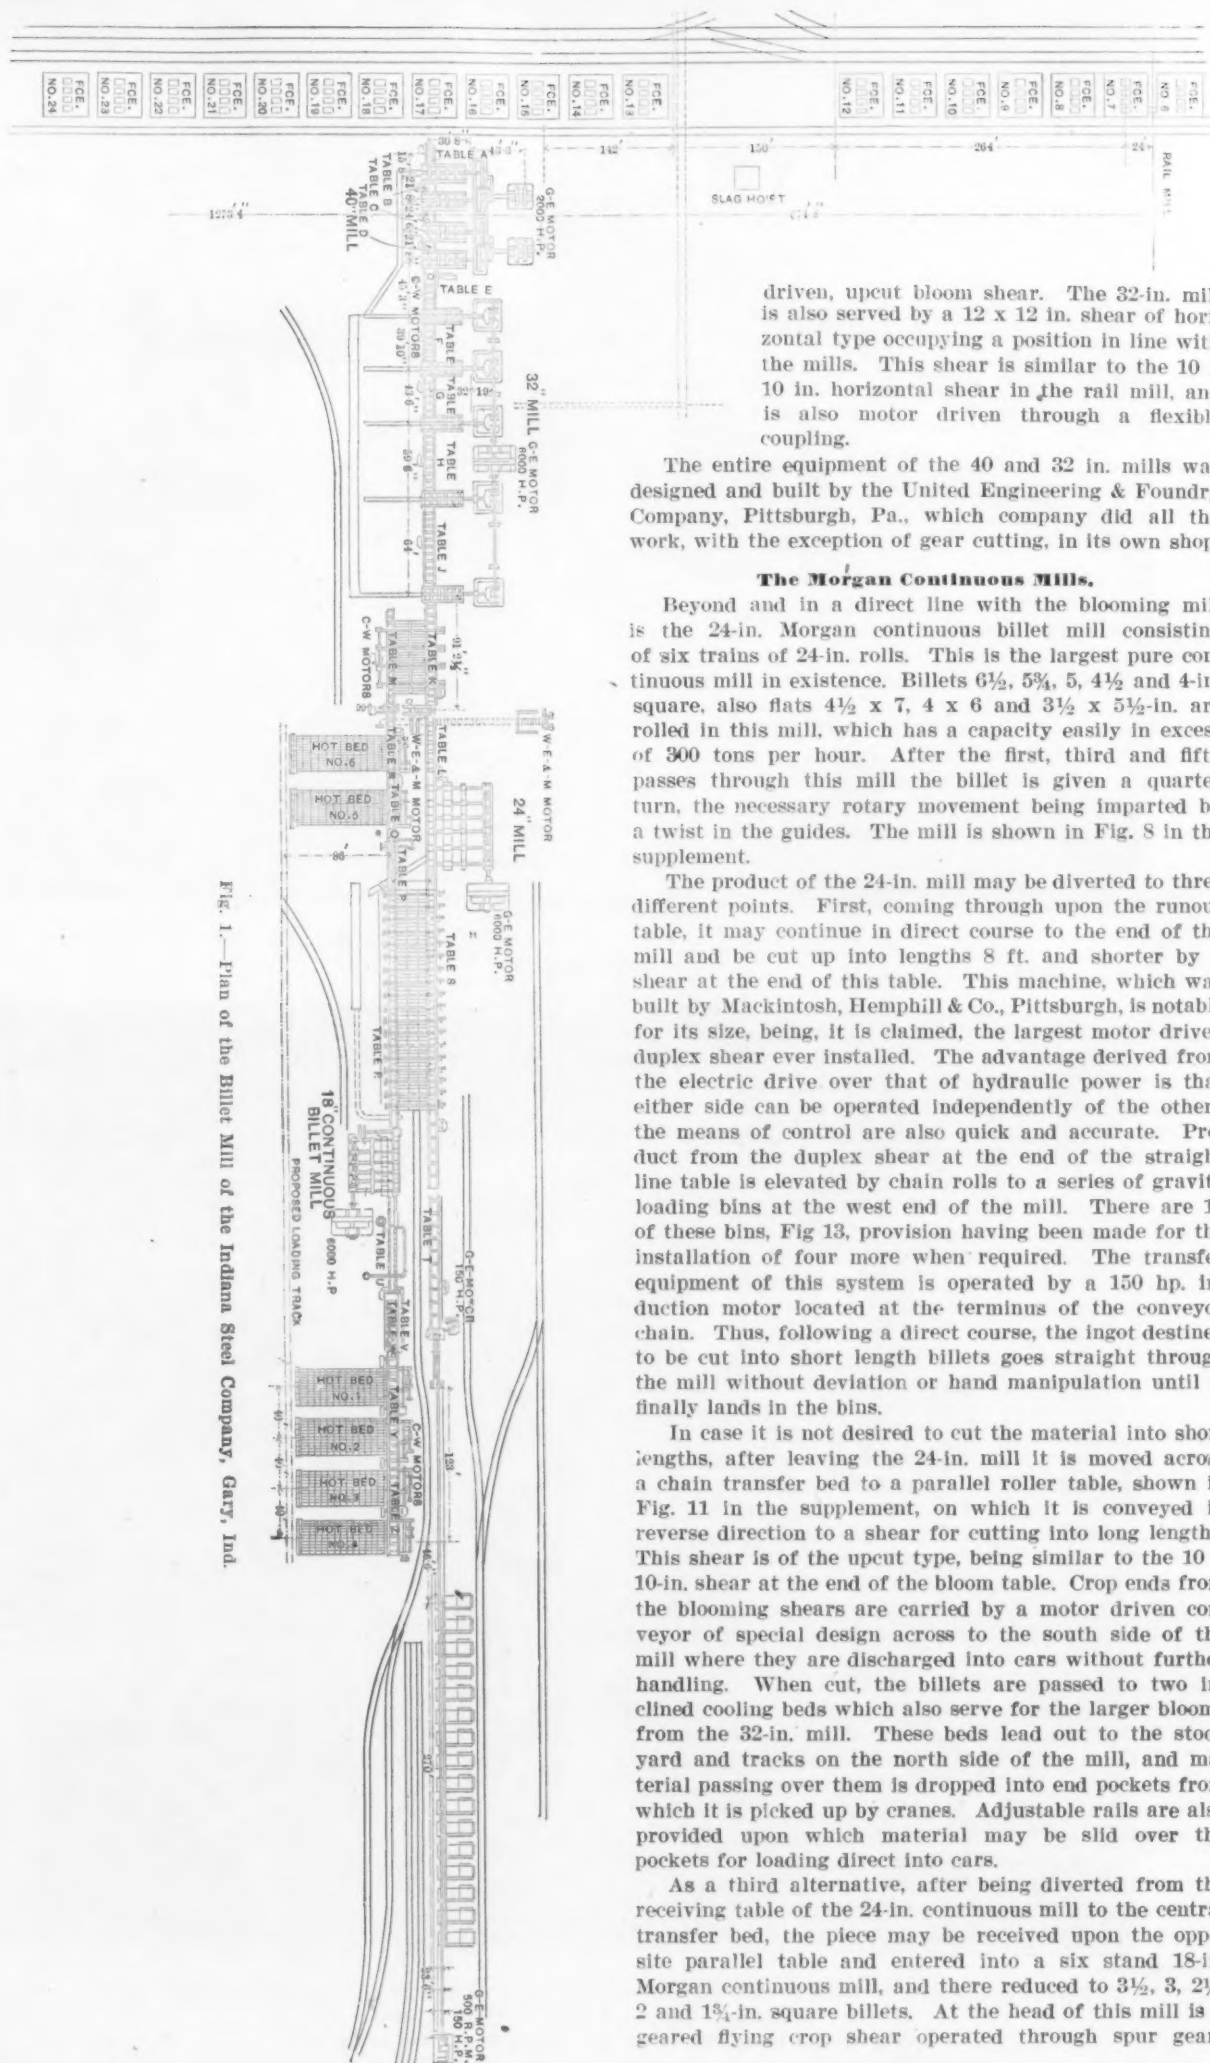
Plan of the Billet Mill of the Indiana Steel Company, Gary, Ind.
